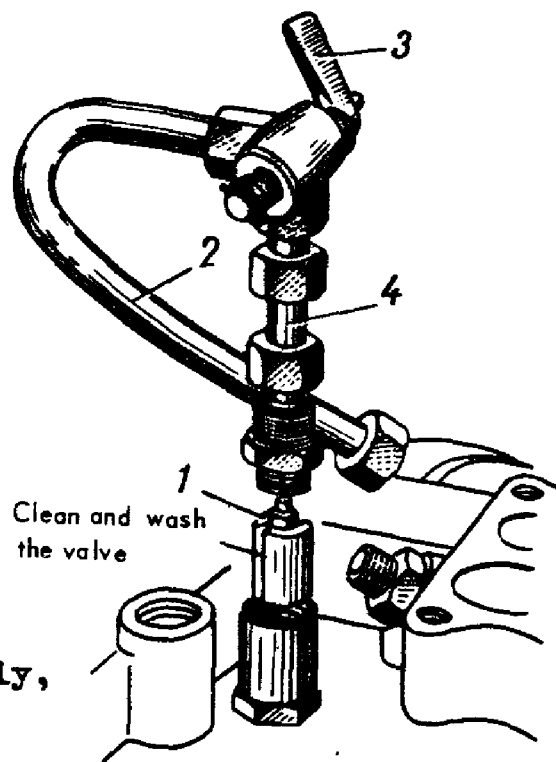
CLEANING AND WASHING CRANKCASE VENTILATION VALVE
